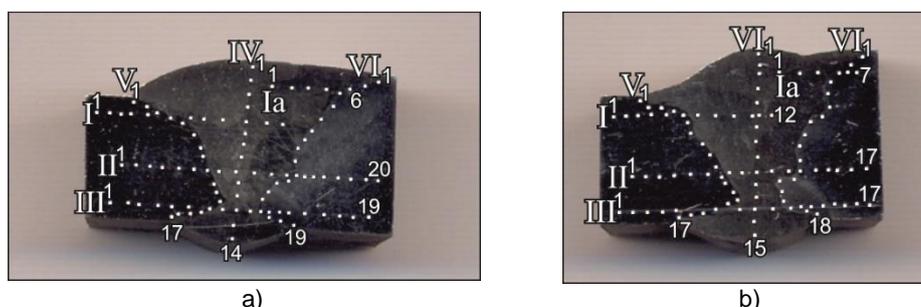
Macroscopic image of the welded plates with impressions from the hardness measurements:
